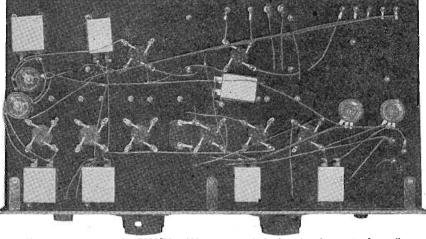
Bottom view PHOTO. "Not a great deal of wiring for an 8-tube set"
